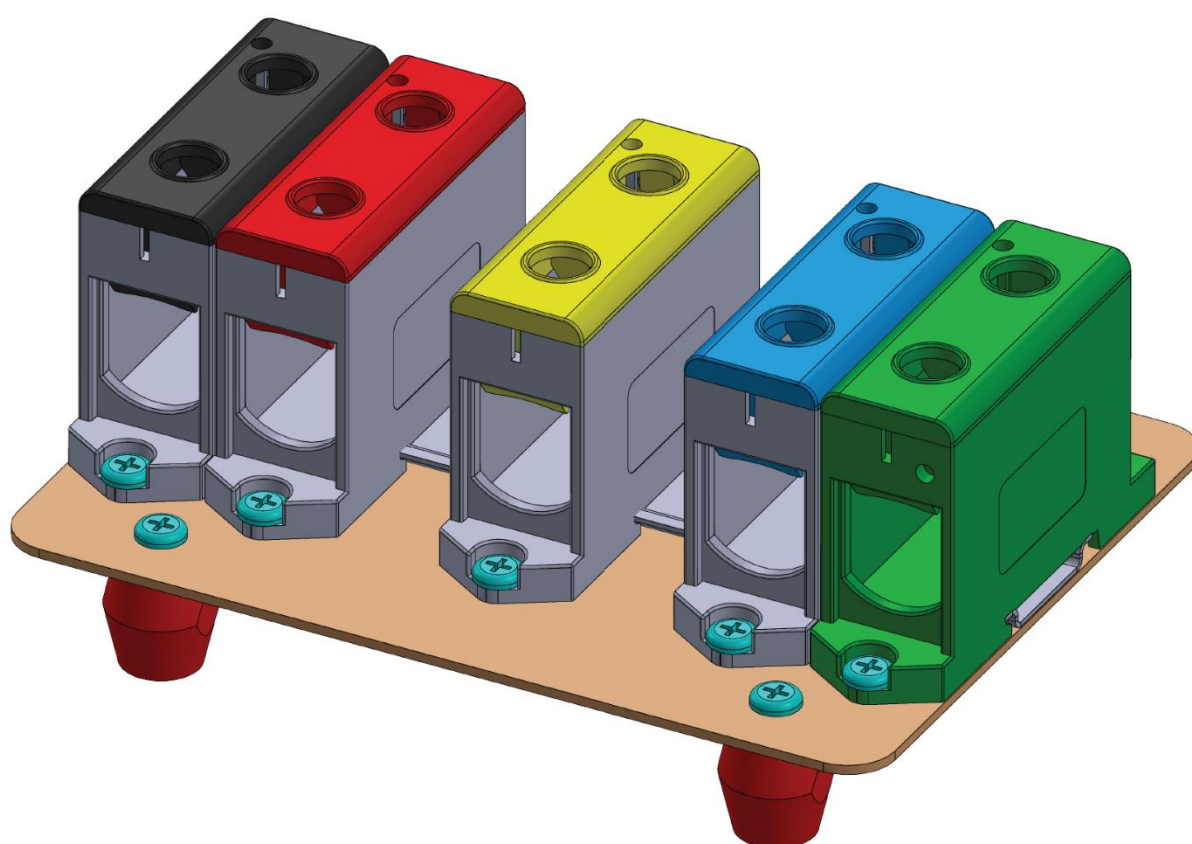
Detail Drawing of Incoming (SEC) Terminal Block 2.0 mm Stainless Steel Mounting Plate for 200/250A CT-Meterbox with Steel Enclosure
